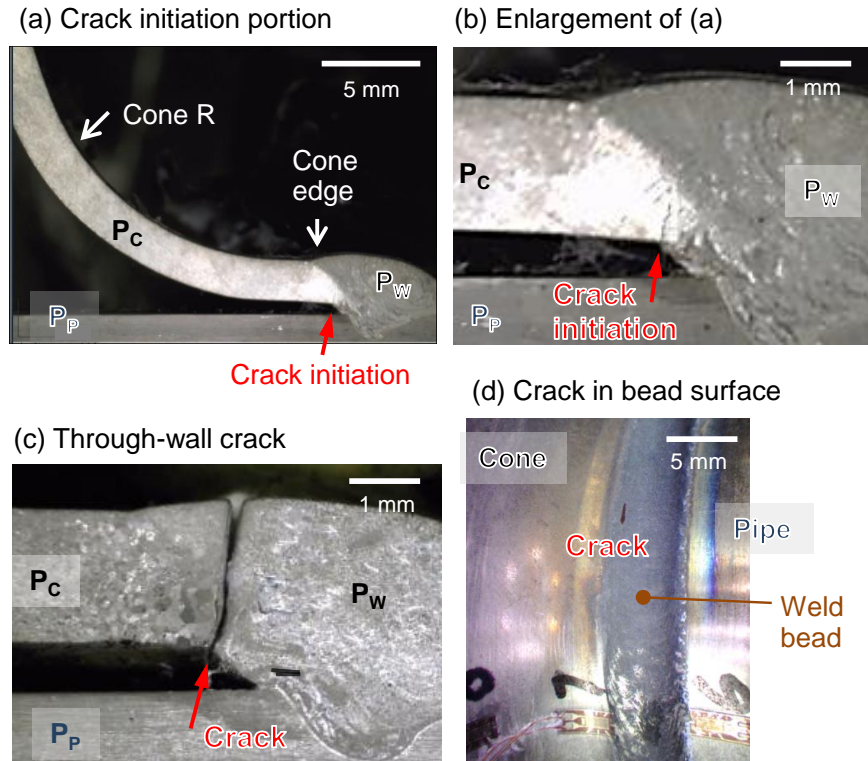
Crack positions after fatigue tests in the HCF regime. (a) and (b) show the internal portion crack initiation of the cone edge. (c) shows the through-wall crack, and (d) shows the crack in the weld bead surface immediately after penetrating the wall.
